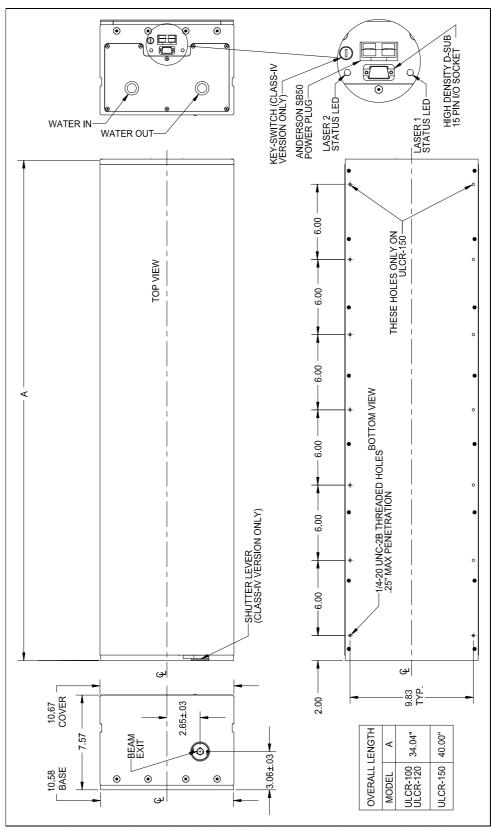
Dimensional Specifications – ULCR Water Cooled
